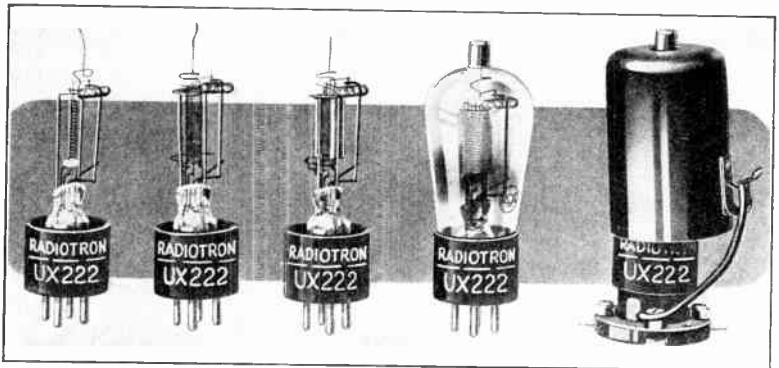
UX-222 Screen Grid Tube in Various Stages of Assembly.
